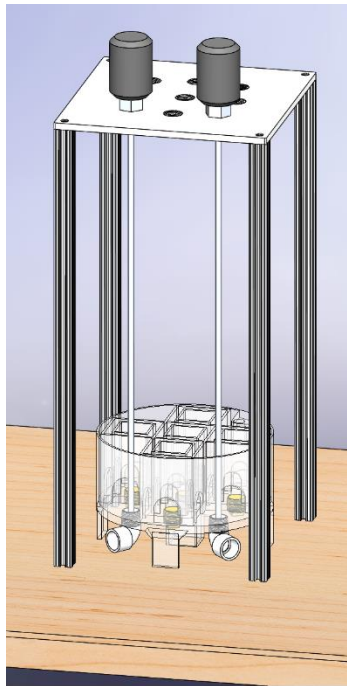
3D Printed Fixture for Surrogate Filling Experiments.
